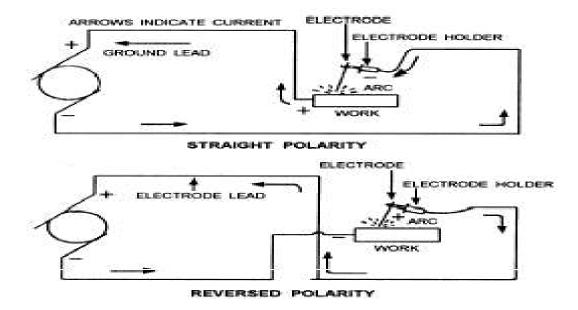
Straight and Reverse Polarity of arc welding process
